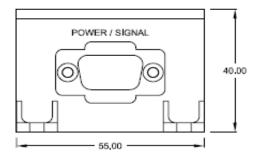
Mechanical Drawing of SPACE GPS unit-Box front View
